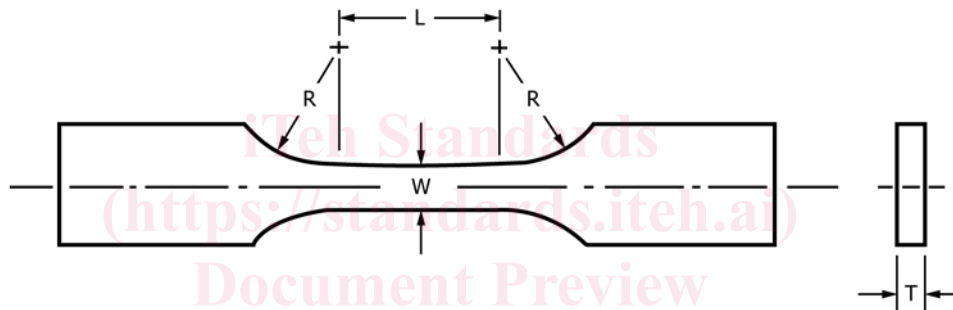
Specimens with Tangentially Blending Fillets Between the Uniform Test Section and the Ends
